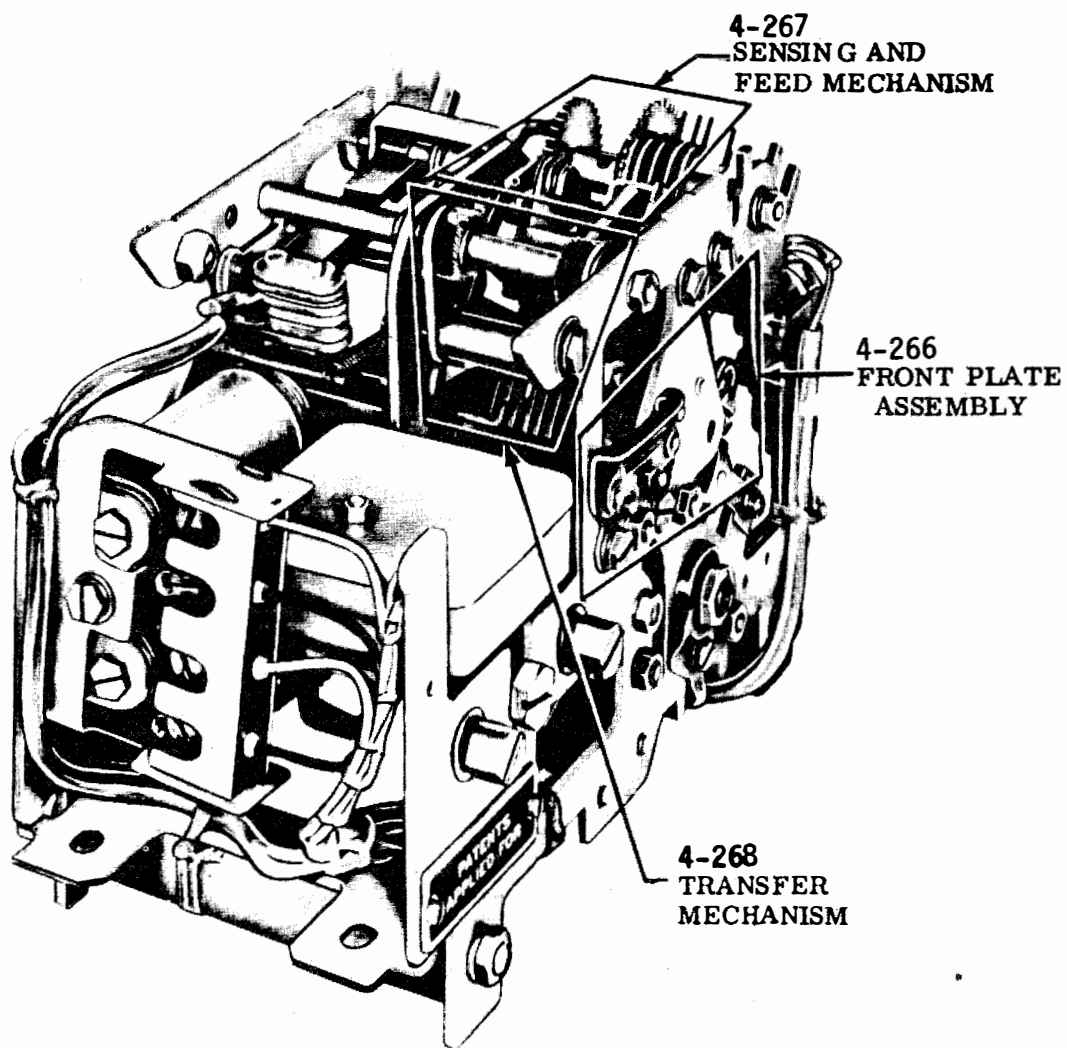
Front Plate Assembly, Sensing and Feed Mechanism, and Transfer Mechanism, Rear View
